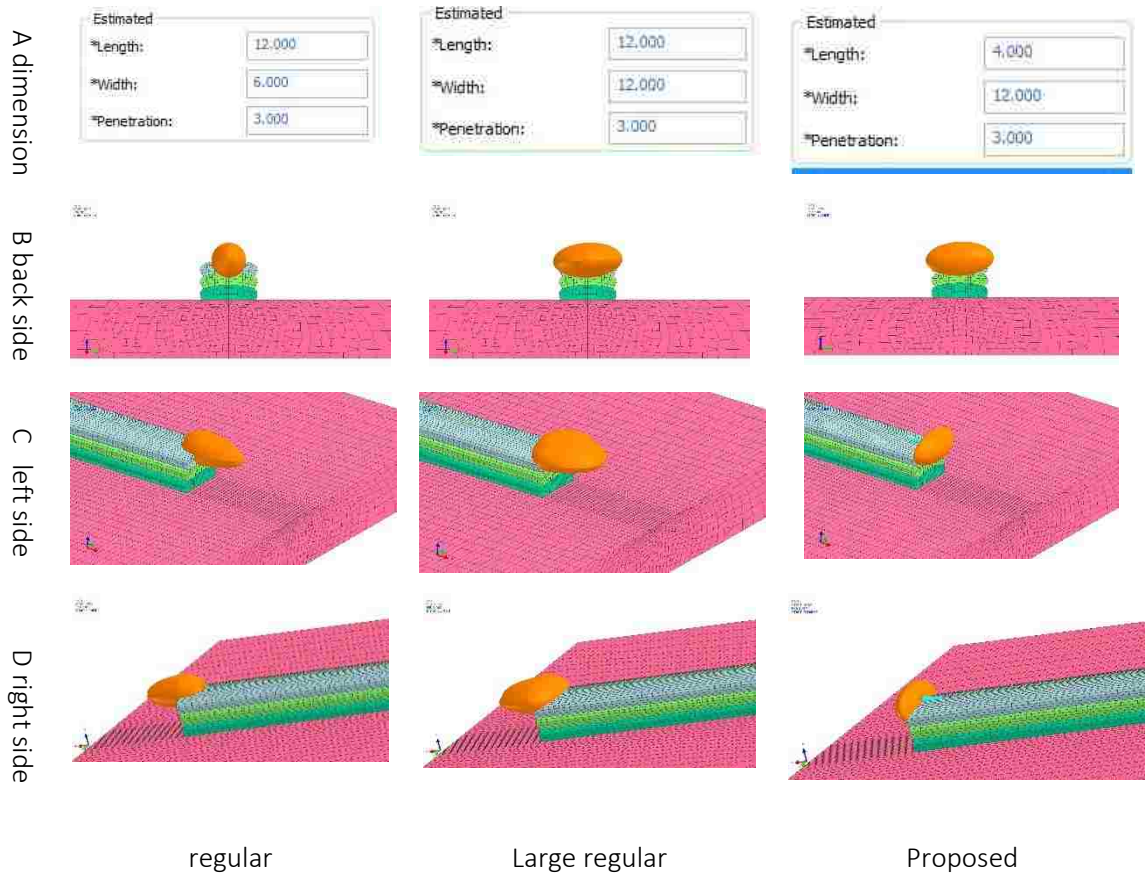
The shape of the estimated arc of the welding
